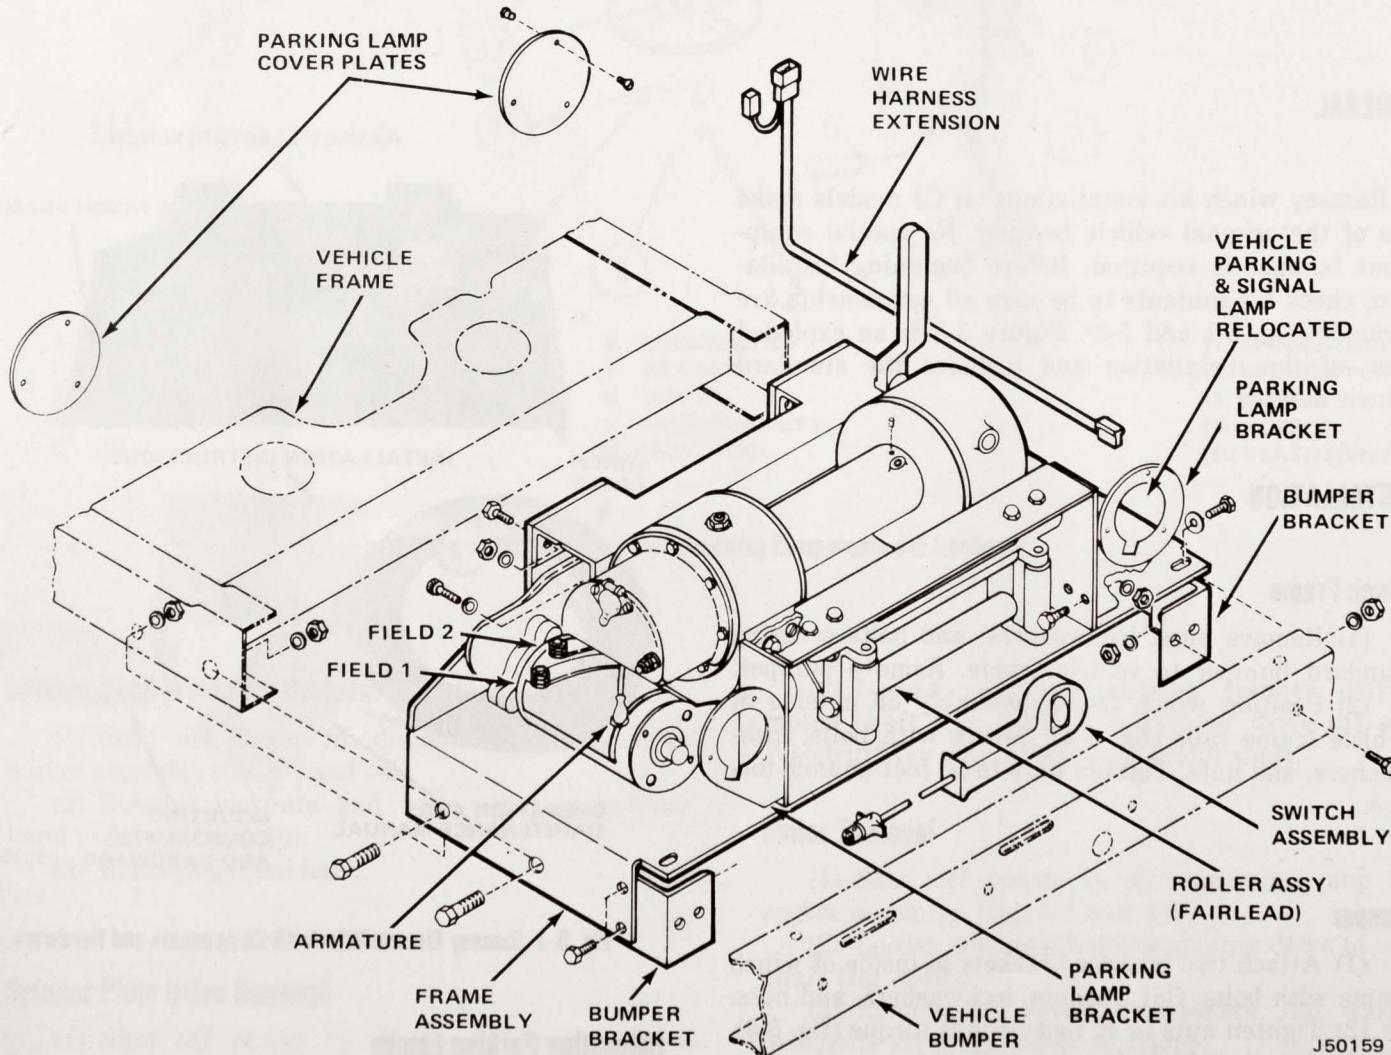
Ramsey Electric Winch Kit Installation—CJ Models
